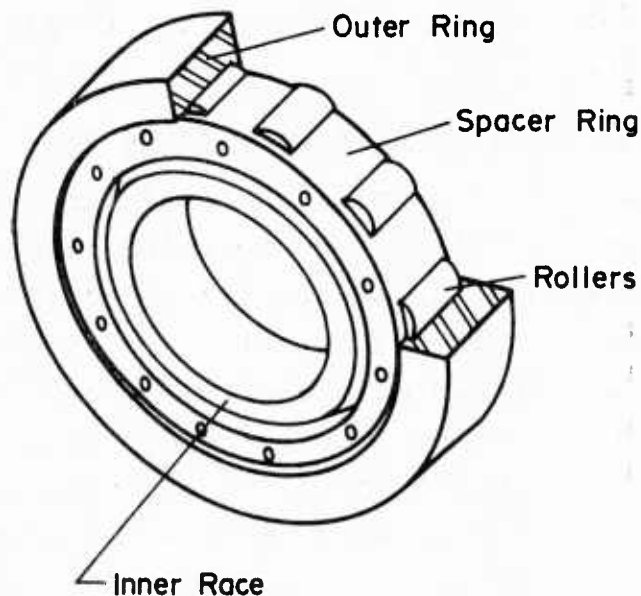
CUTAWAY OF CYLINDRICAL ROLLER BEARING
